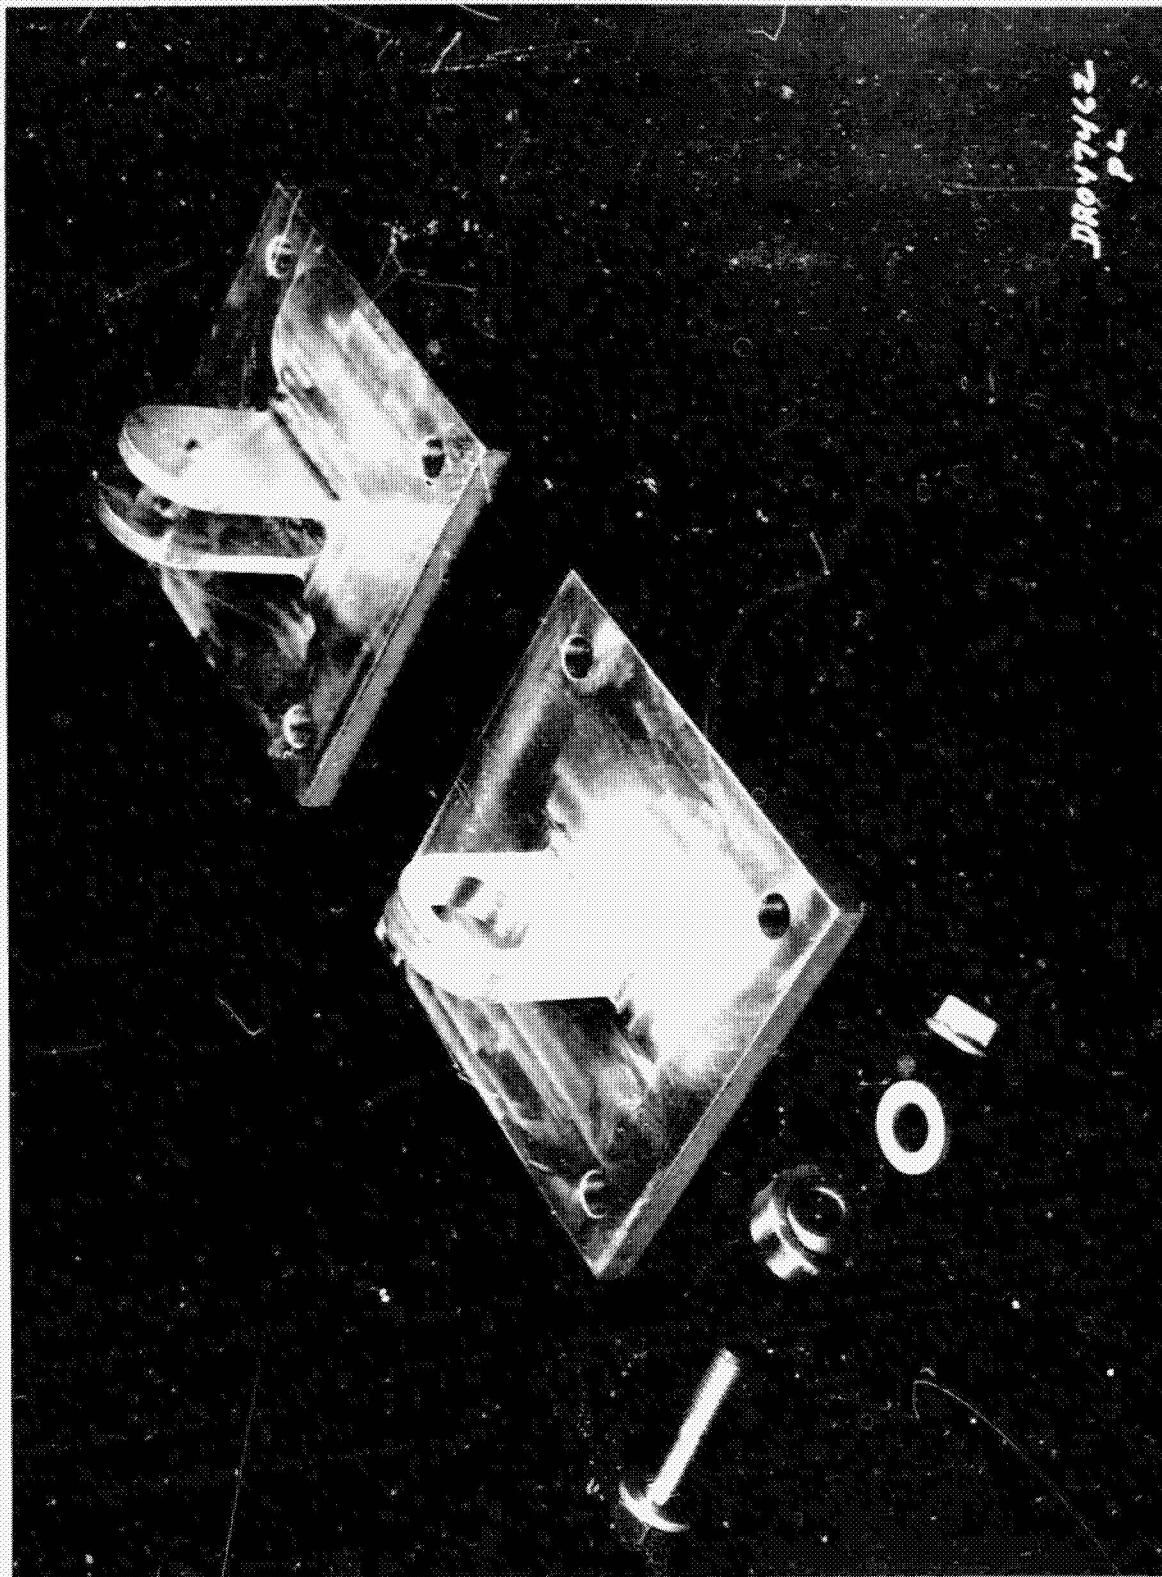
Spherical Bearing Thermal Contact Resistance Specimen Before Assembly
